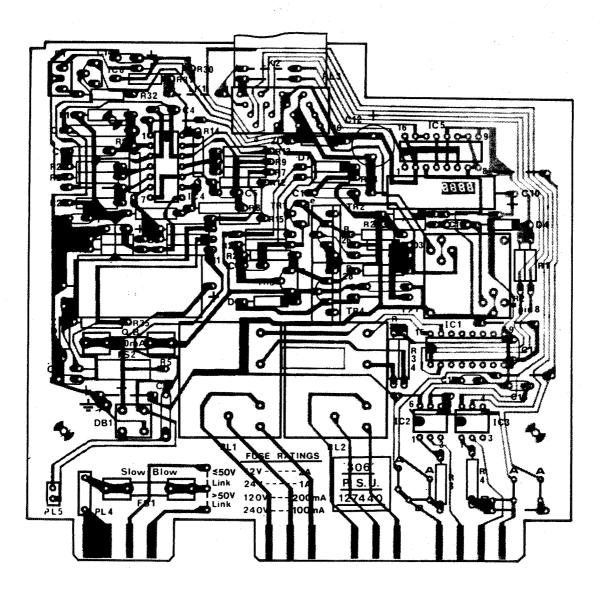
PSU BOARD, PCB COMPONENT LAYOUT (Drawing No.AH127440, Issue 4)
